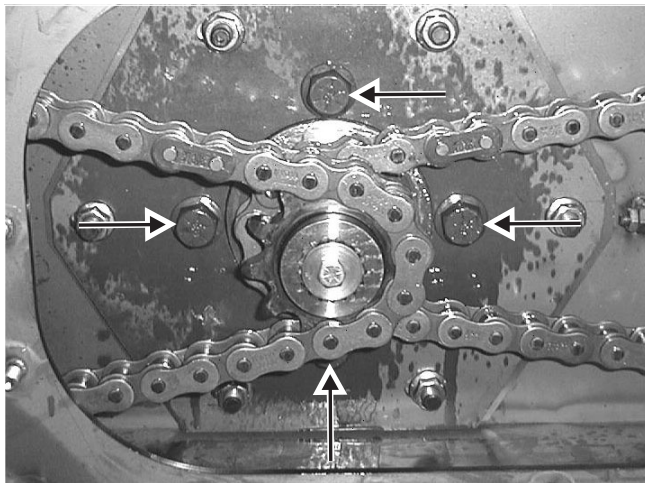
Location of four capscrews and seal washers securing drive motor to chaincase.
